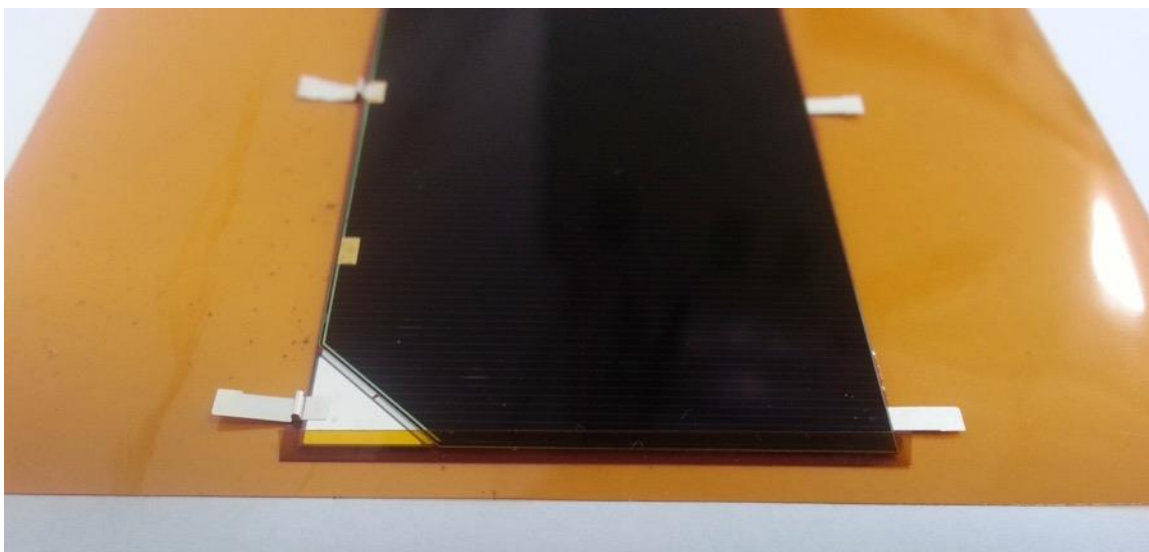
Thermoformed Kapton outgassing shield viewed from short side of cell.
